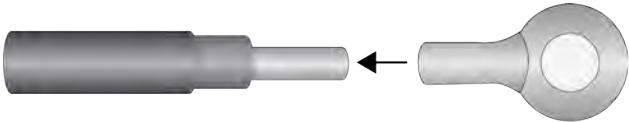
Sliding the Ring Terminal Lug on the Grounding Wire
